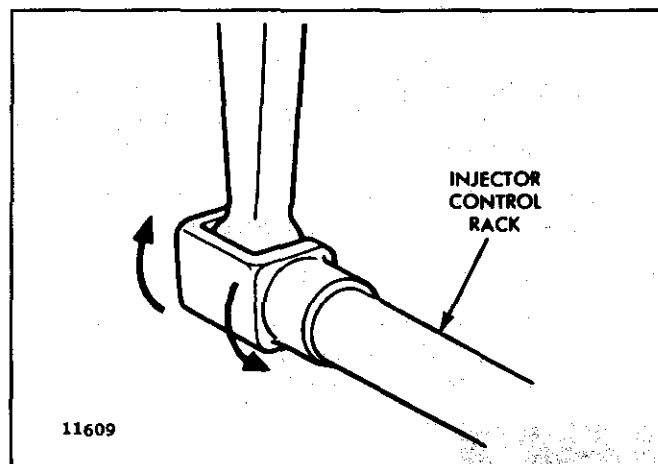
Checking Rotating Movement of Injector Control Rack
